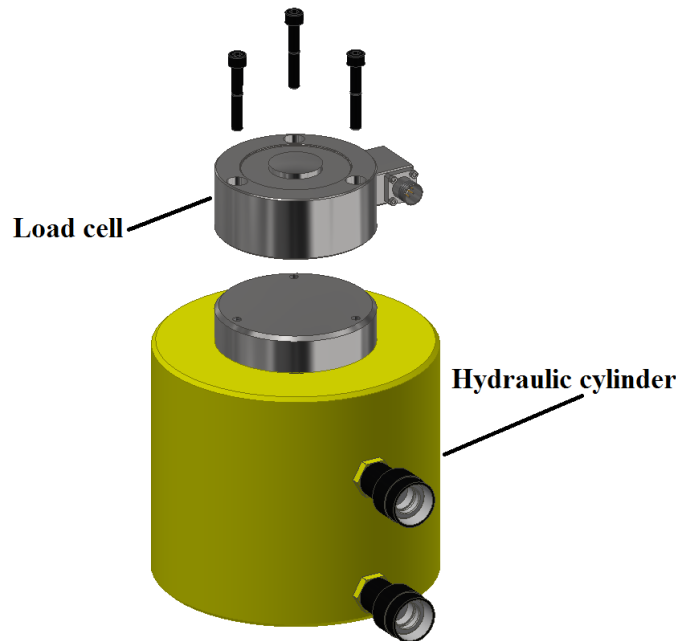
Hydraulic cylinder setup for testing the center web plate substructure
